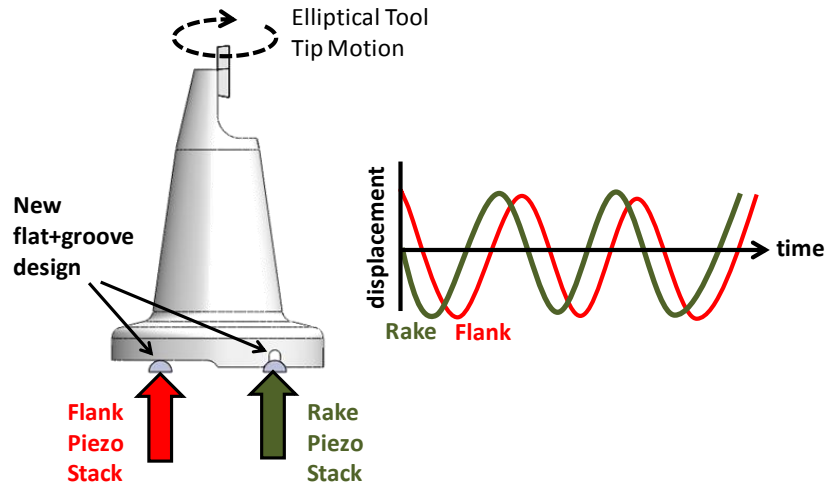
New flat+groove Ultramill toolholder design and kinematic linkage for elliptical toolpaths
